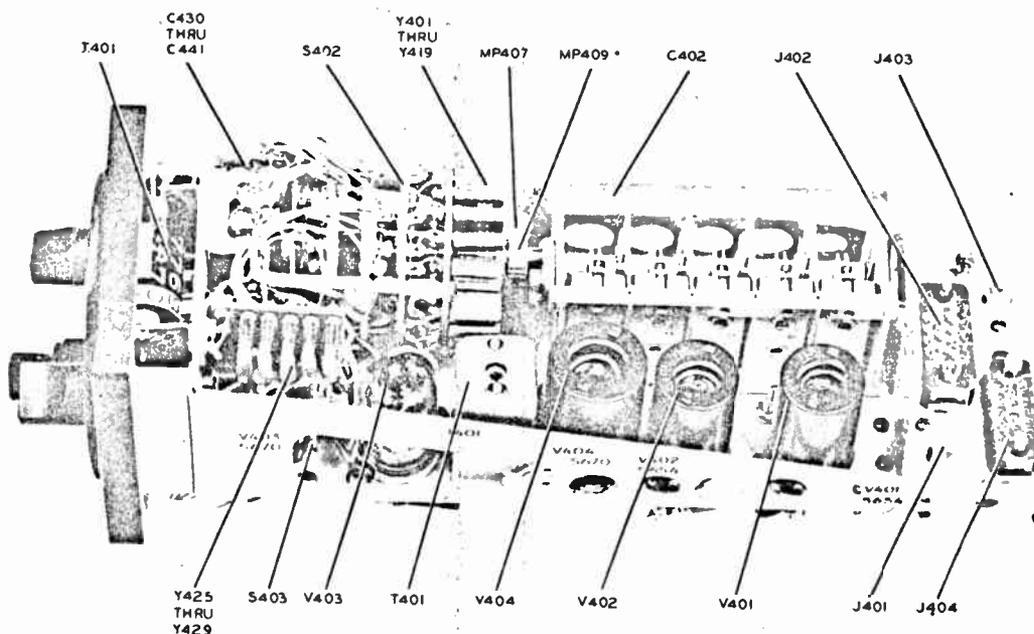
Receiver 51X-3, Top View, Dust Cover Removed
